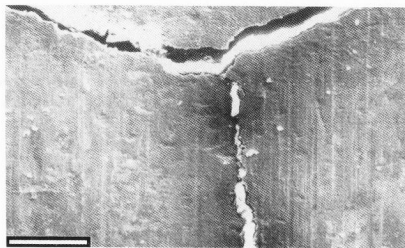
Stress corrosion crack near the weld on the outside of a can that contained pet food. Bar=100 μm .
